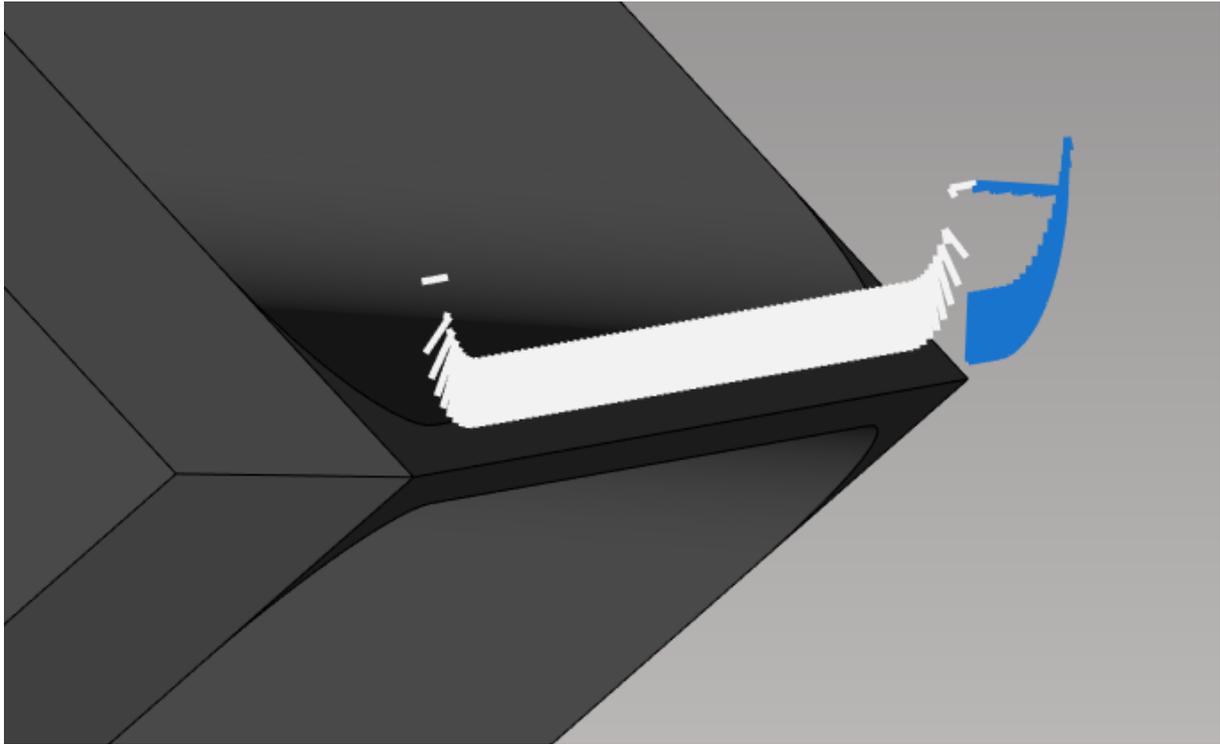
Step file is designed with X cut on the web, but the final cut is straight
